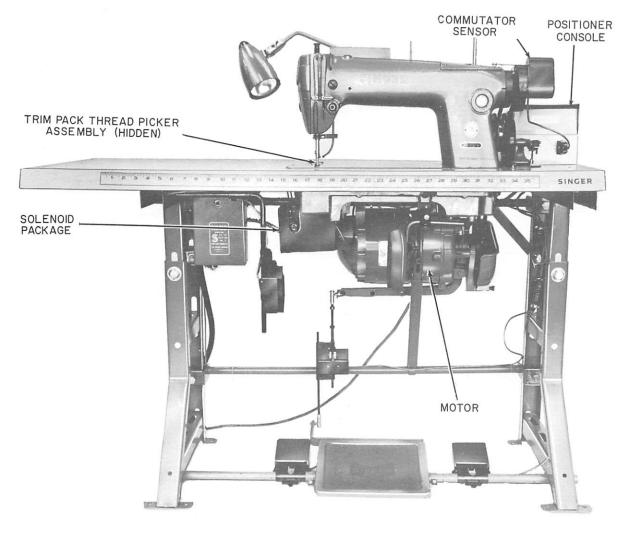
SINGER Needle Positioner and Underbed Trimmer Equipped Sewing Machine
